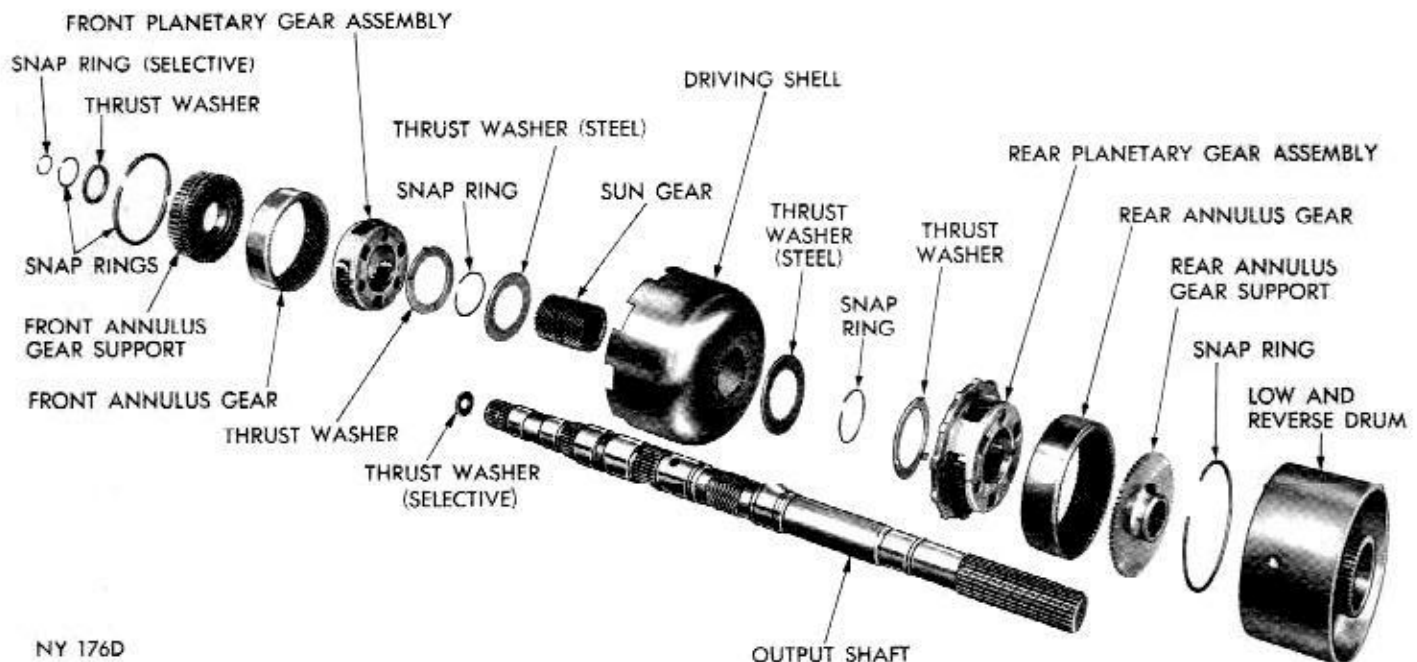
Planetary Gear Train and Output Shaft Disassembled (A-904)
